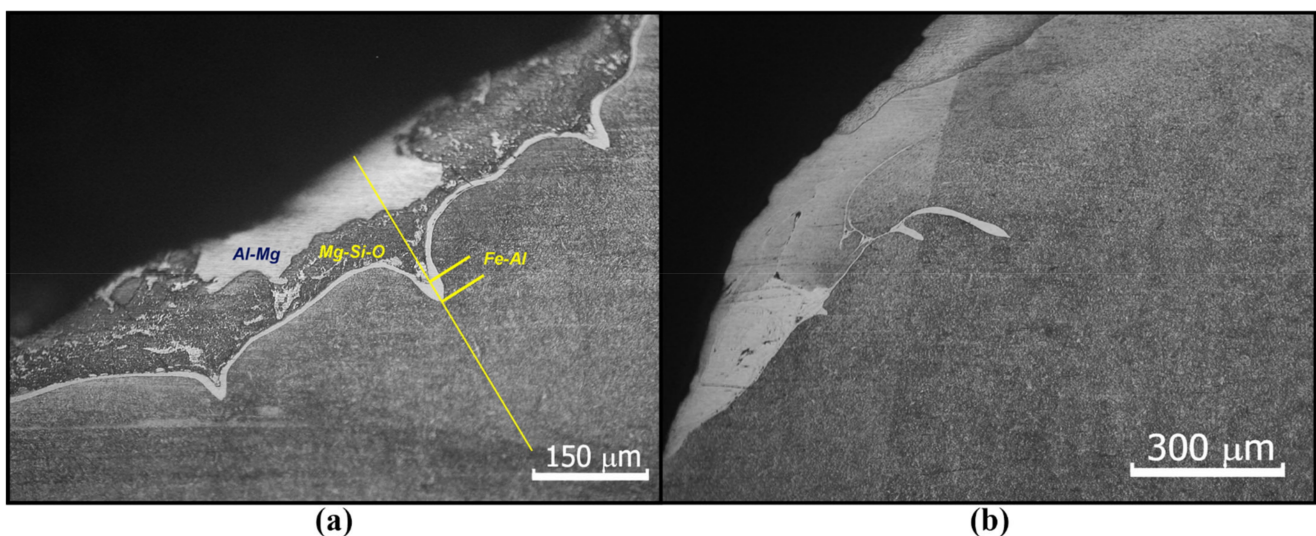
Wear of steel (1.2344 X40CrMoV5-1) tools during friction stir welding of aluminum alloys. (a) formation of intermetallic compounds layers on the surface of the tool; (b) formation of intermetallic interlayers spreading deep into the tool material. Optical images from the work [108] 2014, Elsevier.
